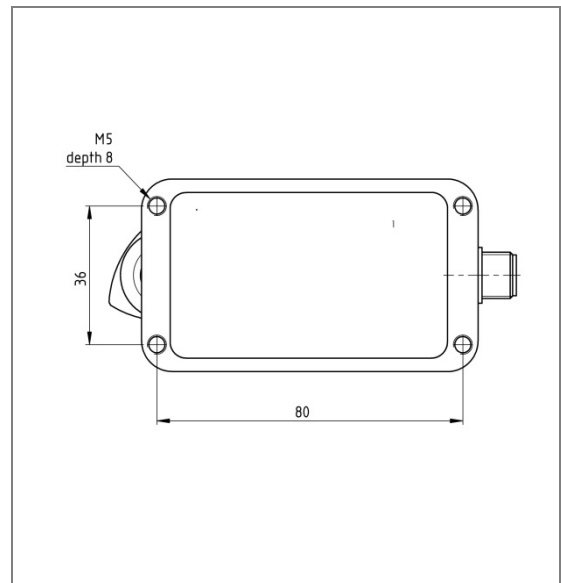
Rear side with drill holes for mounting SONOFLOW CO.55/xxxSDH V2.0
